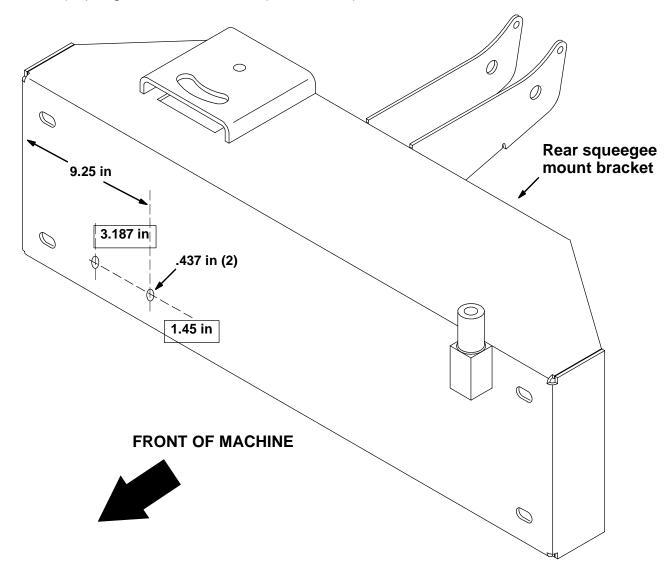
Rear Squeegee Frame Rework Dimensions
